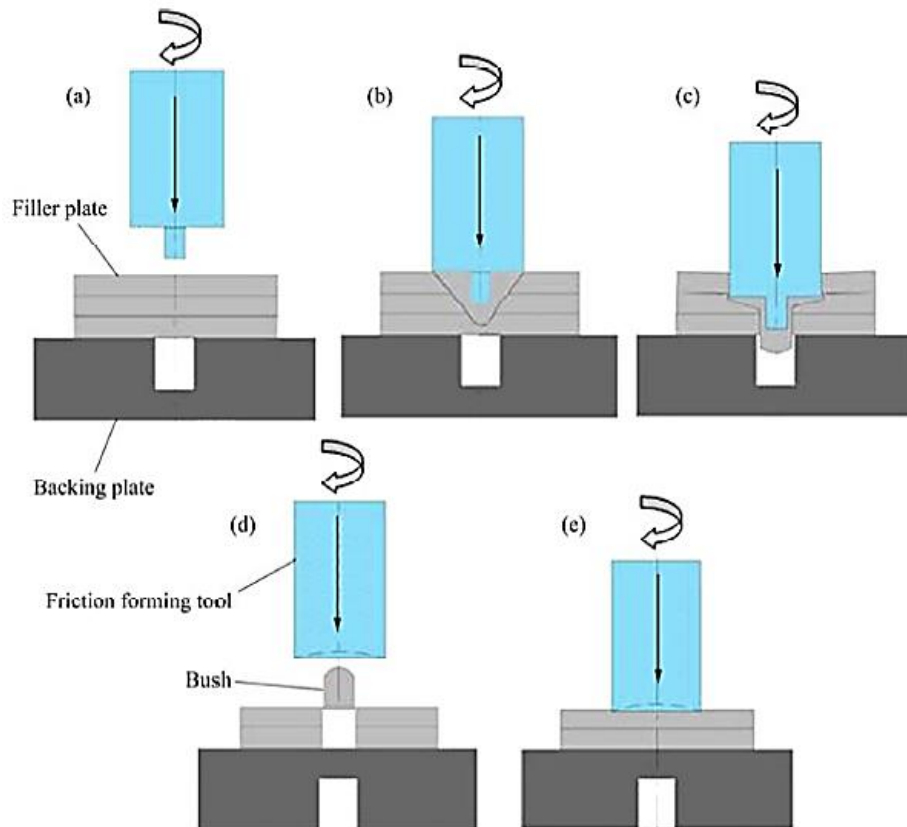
A Friction stir spot welding with refilling by friction forming process using filler plate (Venukumar, Yalagi, and Muthukumaran 2013)
